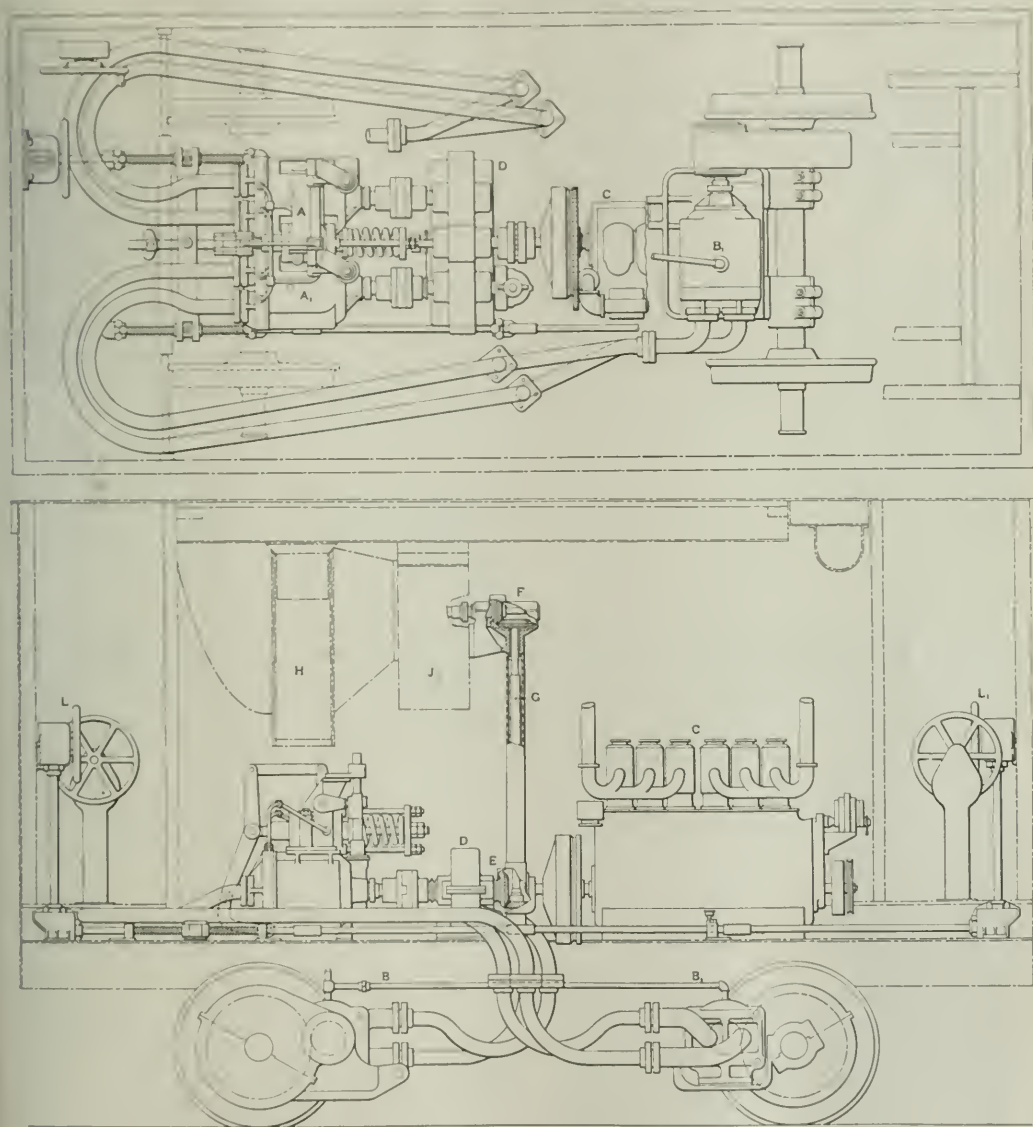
Plan and Elevation of Gasoline-Hydraulic Locomotive
